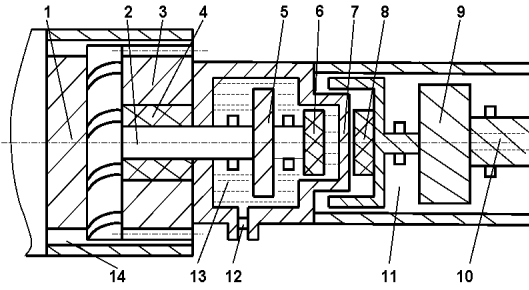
Structure of axial magnetic drive mud generator, 1: Turbine, 2: Control shaft, 3: Liquid allocator, 4: Dynamic seal structure, 5: Transmission, 6: Inner magnetic rotor, 7: Distance sleeve, 8: Outside magnetic rotor, 9: Motor, 10: Through wire line, 11: Air chamber, 12: Hydraulic balance system, 13: Oil chamber and 14: Mud flow channel
